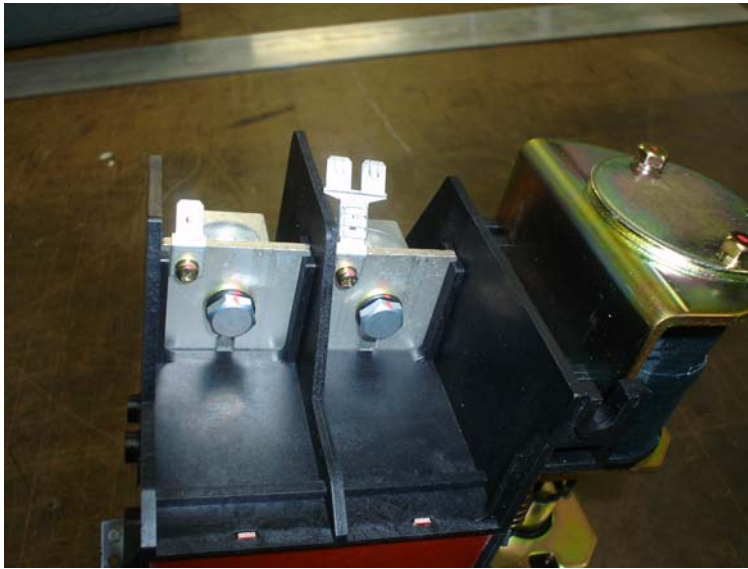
UNDERSIDE OF SWITCH SHOWING THE NORMAL LUG MOUNTING SCREWS
